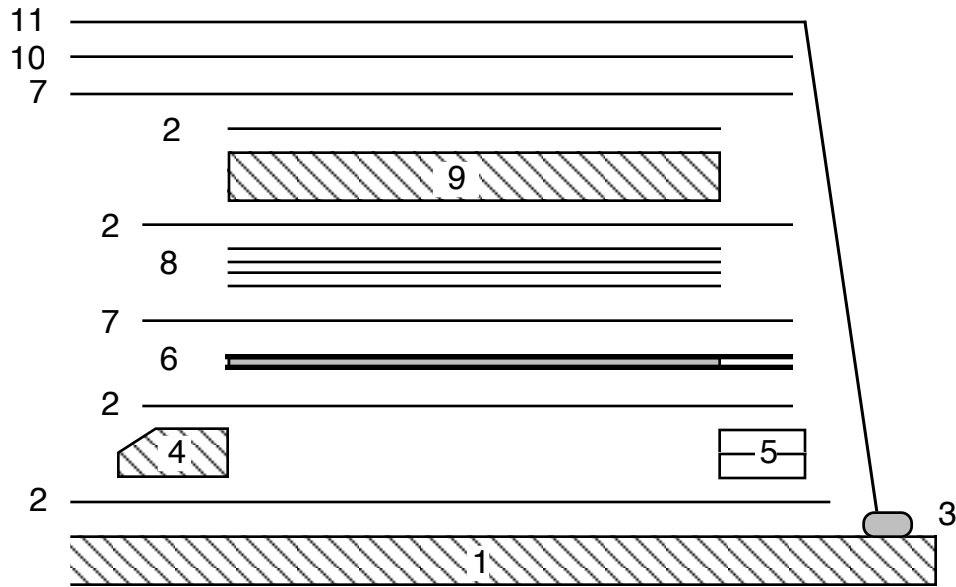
Layout of T-dam and corprene rubber strips on aluminum caul plate to form well for composite laminate.
